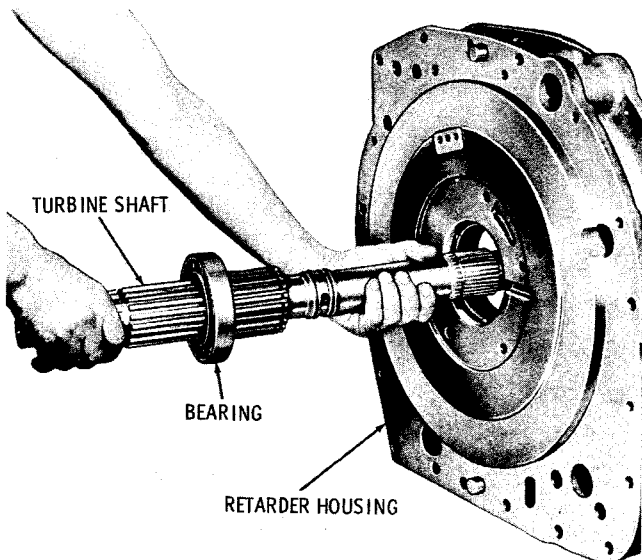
Removing turbine shaft and bearing (CBT, CLBT, VCLBT) S1591
